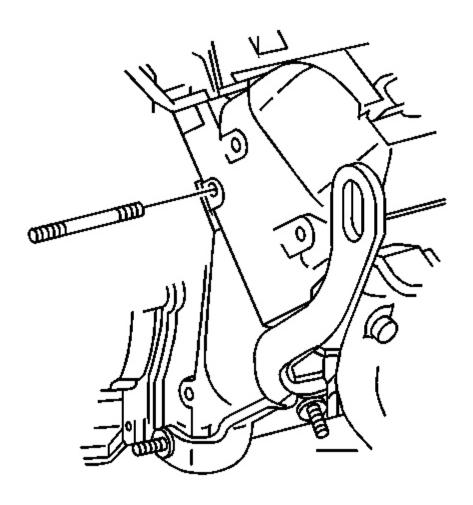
Locating Power Steering Pump Mounting Bracket Stud Courtesy of GENERAL MOTORS CORP.
